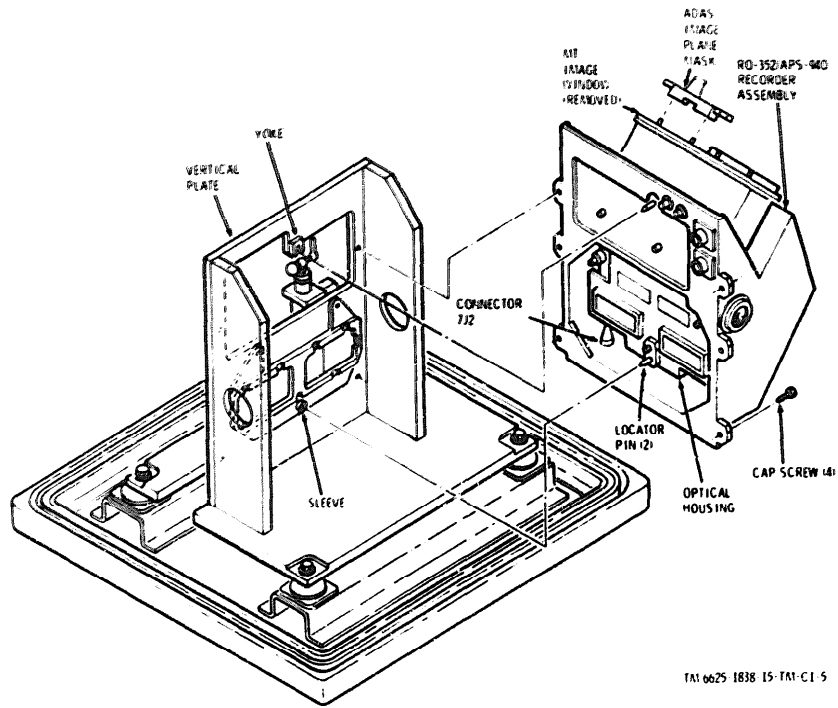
Installation of RO-352/APS-94D recorder assembly on Test Fixture, Optical Alignment TS-2966/APS-94D.
